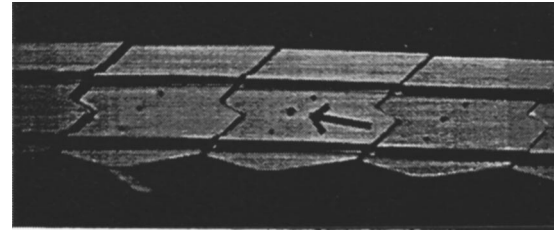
Picture of the tip shroud segments. The picture shows the cooling holes and the enlarged hole for identification of the blades.
